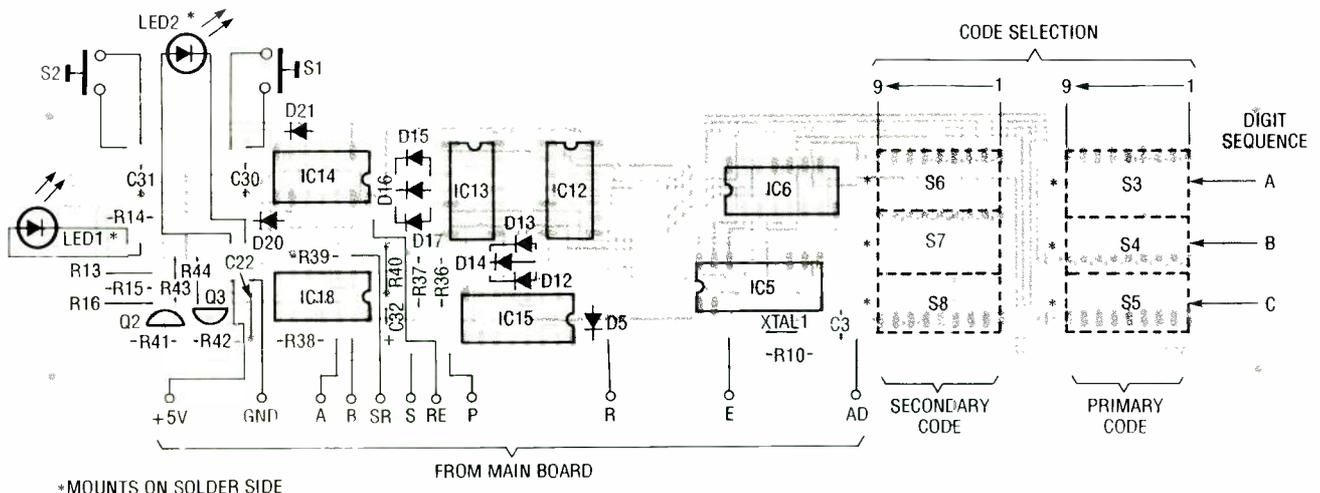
PARTS-PLACEMENT DIAGRAM for the front-panel PC board. The DIP switches can be left out if you hard wire the access codes.
